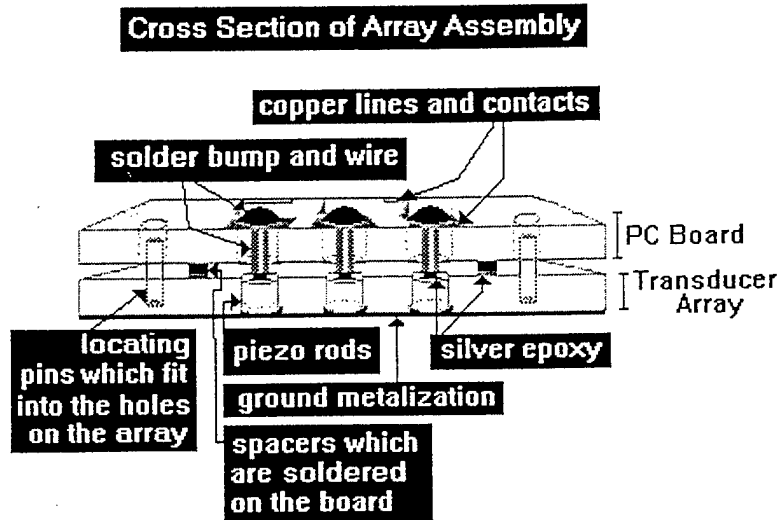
The array assembly consists of a PC board with copper wires soldered to copper contacts, soldered spacers and soldered locating pins. On the top side of the PC board are copper contacts and lines that lead to a 54 pin socket. Locating pins fit into holes in the array. Copper wires are bonded to the rod metalization with silver epoxy. Spacers prevent bent wires and short circuits and bond to the array with silver epoxy for mechanical support.
